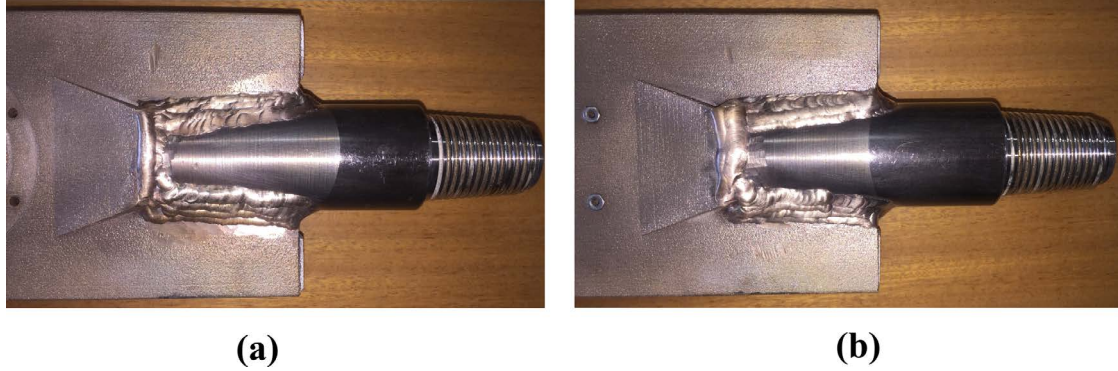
Both sides of the welded section of the instrumented dilatometer
